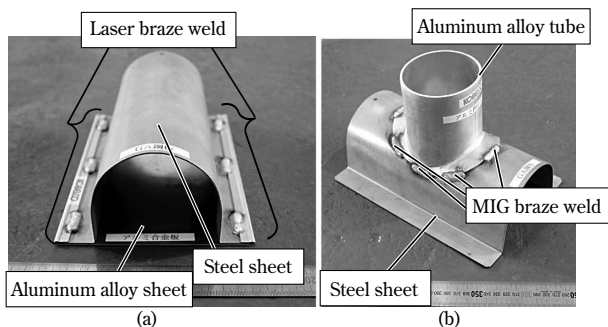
Example of welded parts<sup>8)</sup>
